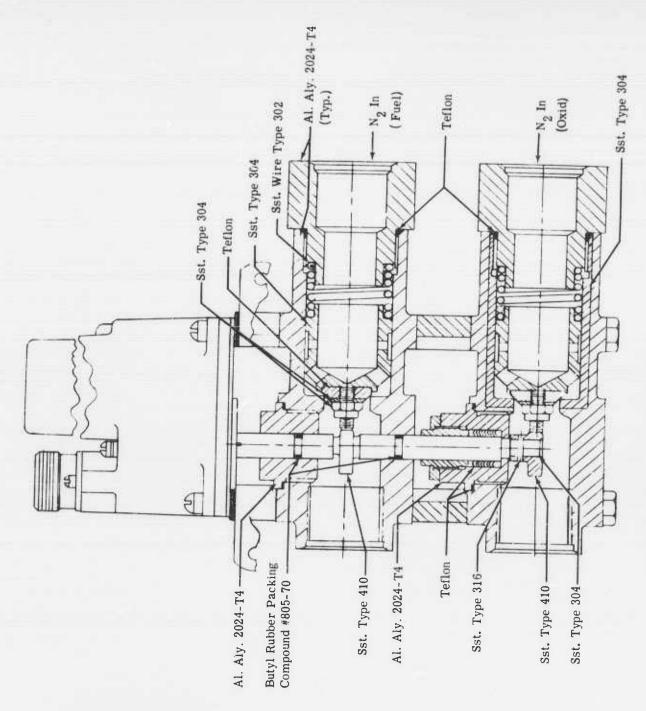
Cross Section - Valve Assembly - Jettison 62-472-034
